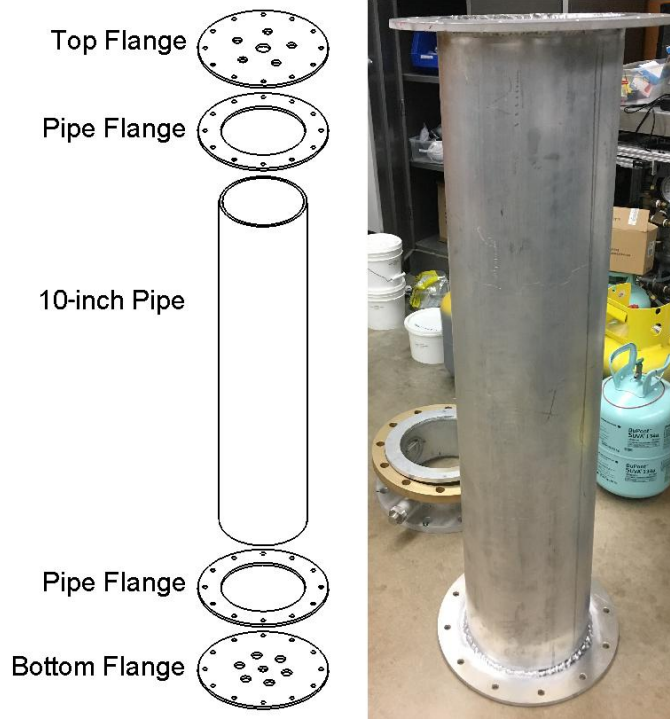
Left: Pulse generator tank components; Right: Flanges welded to 10-inch pipe
